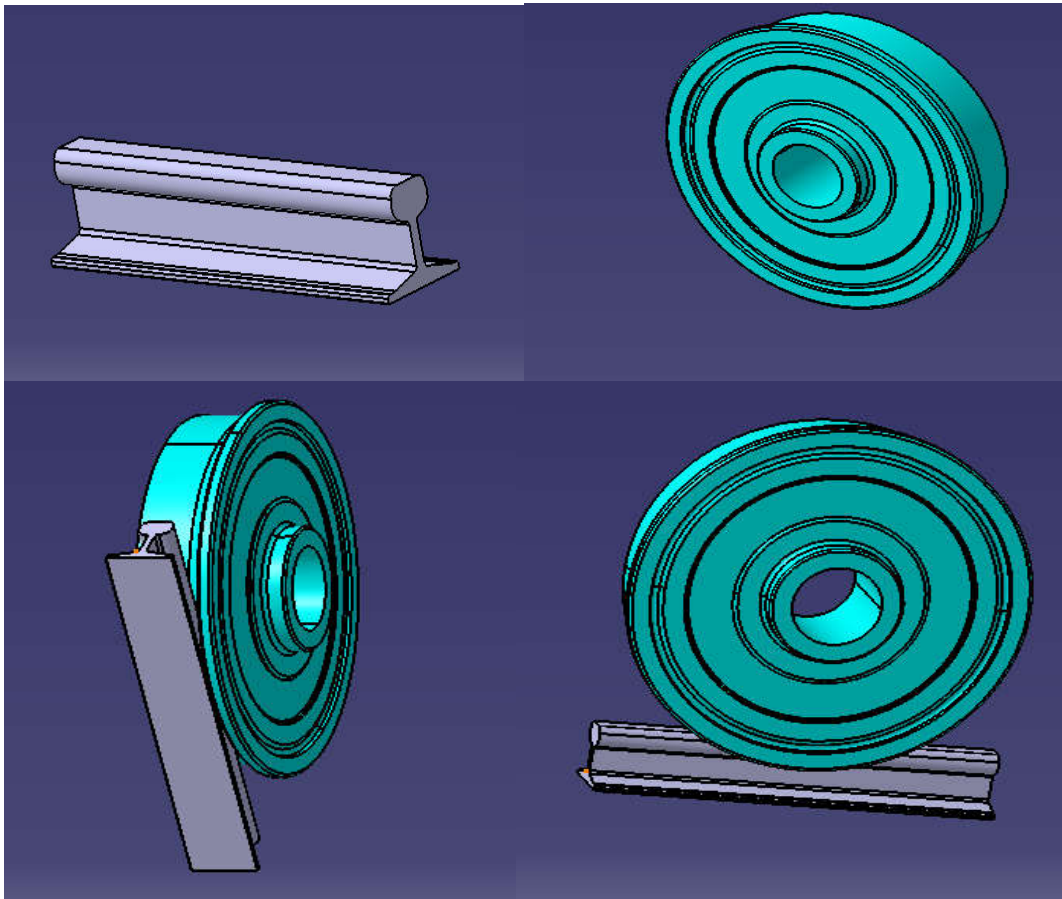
Rail-wheel assembly modes on CATIA rail head to wheel tread contact
